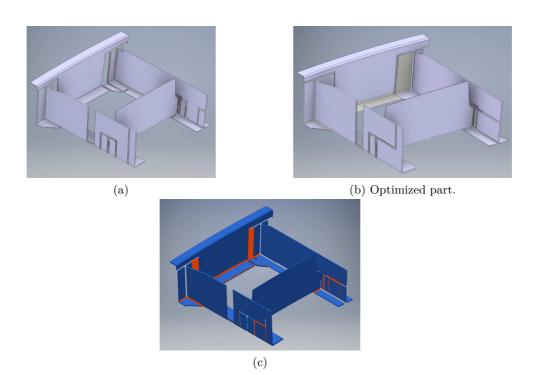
Example part with cut out of non inspectable volume. (a) Part design before optimization, (b) Part optimized for NDT inspection. (c) Optimized part with highlighted differences to non optimized part.
